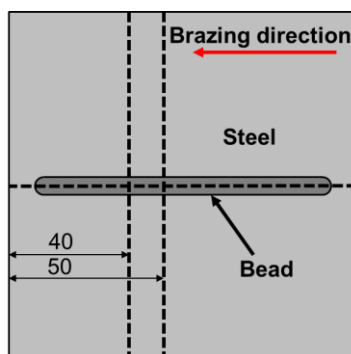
Cutting line of the bead on plate brazing specimen.
